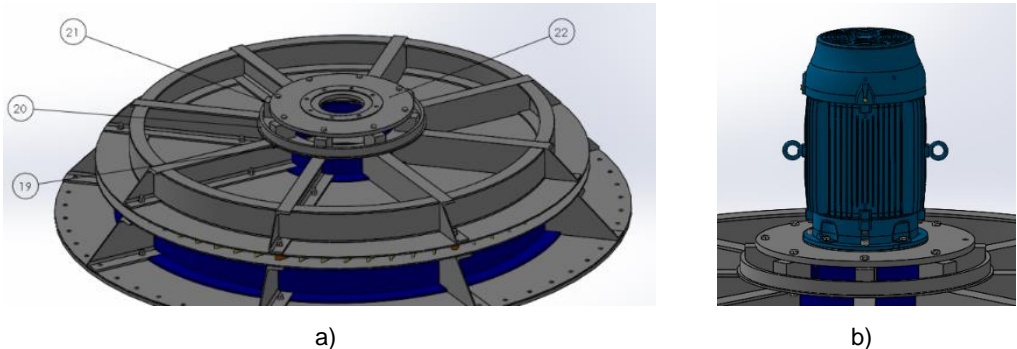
Generator support structure: a) Identification of components; b) Generator in position
